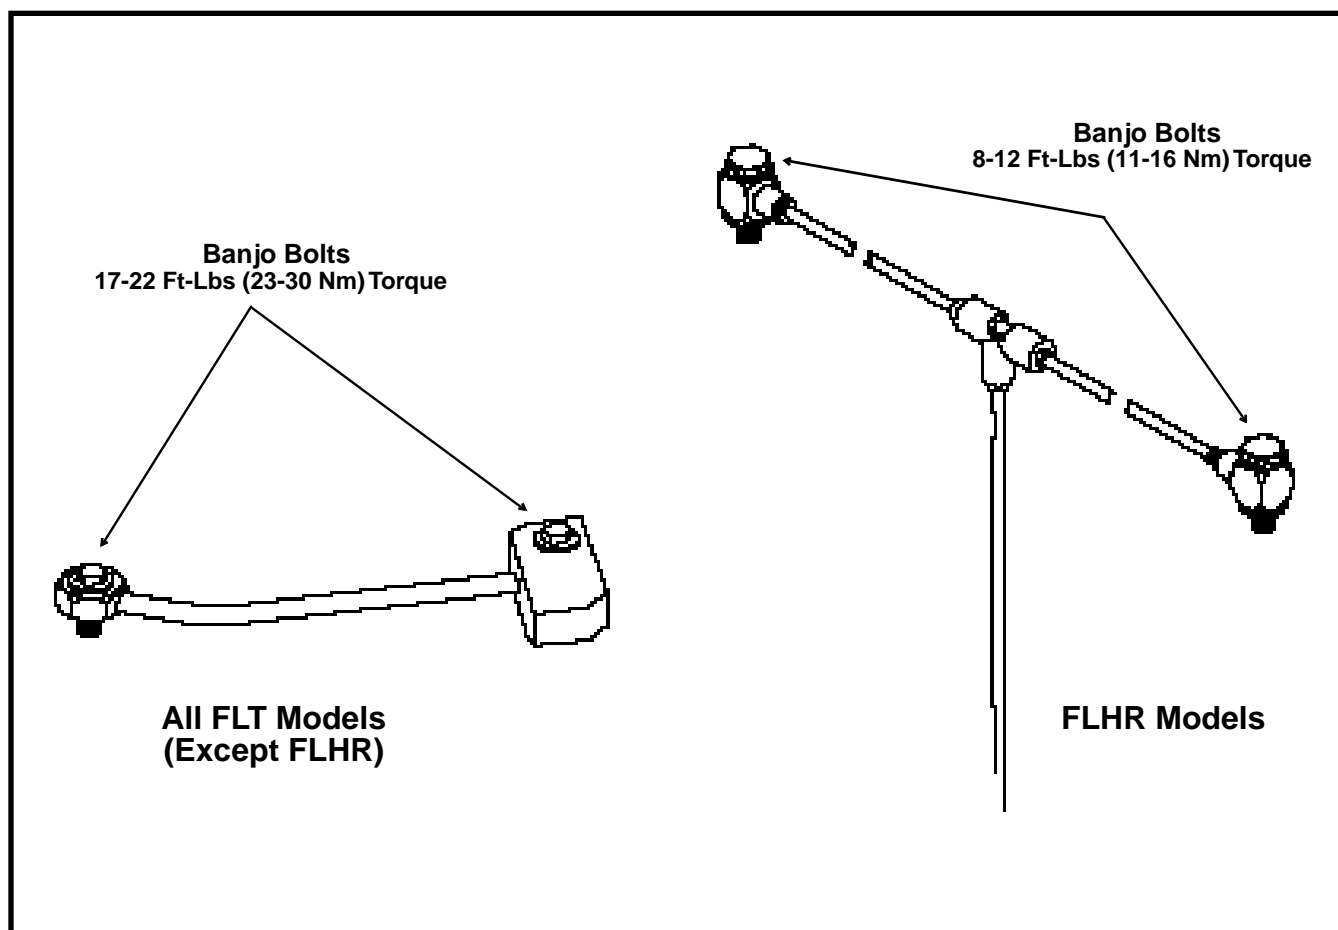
Tighten Front Fork Air Control Banjo Bolts to the Proper Torque
